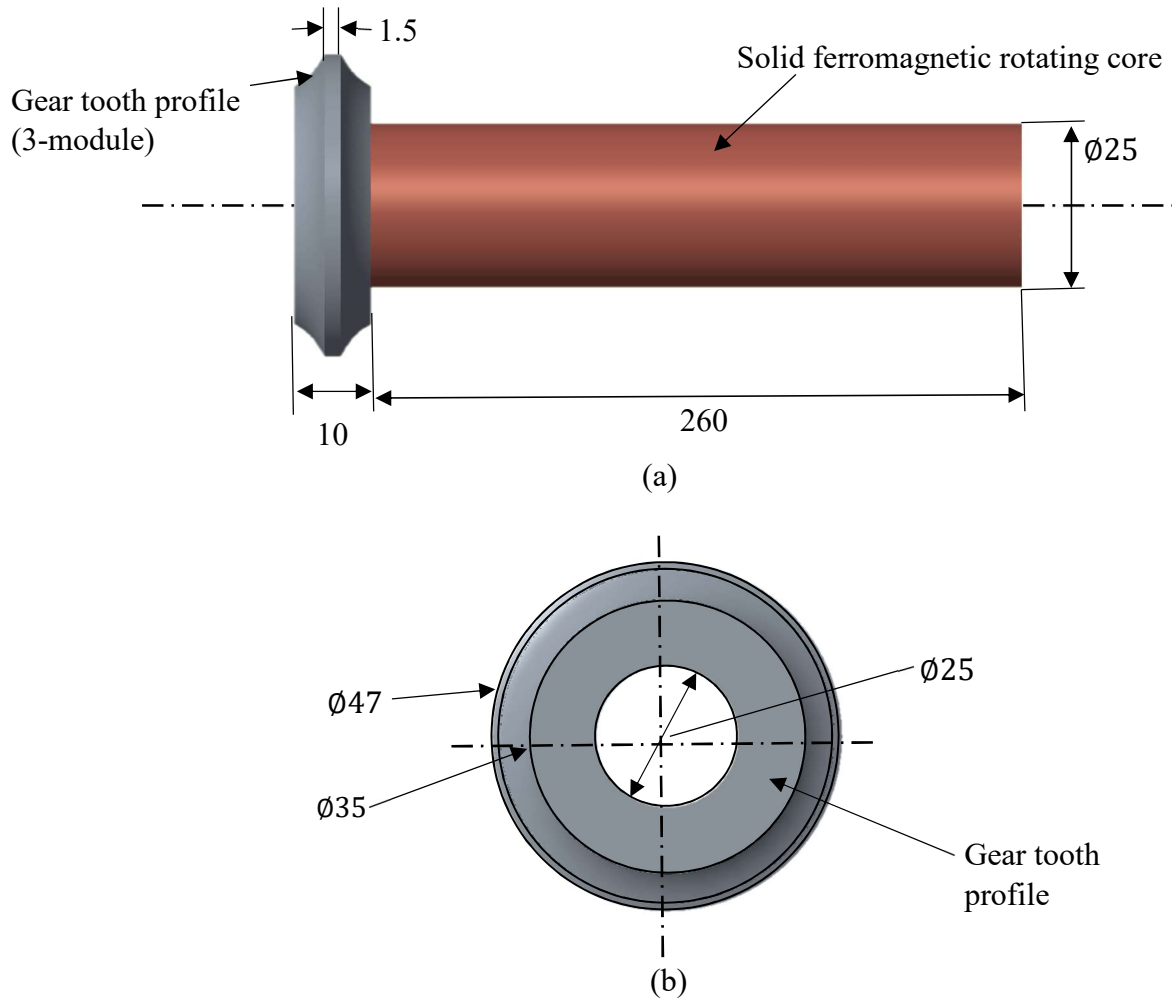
CAD model of the rotating core with gear wheel tool profile (a) from top view and (b) side view, all dimensions in (mm)
